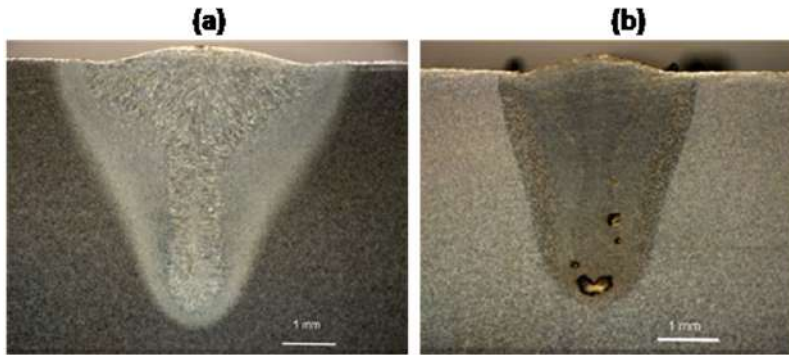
Comparison between (a) a laser weld and (b) a hybrid laser-arc weld in 250 grade mild steel.
